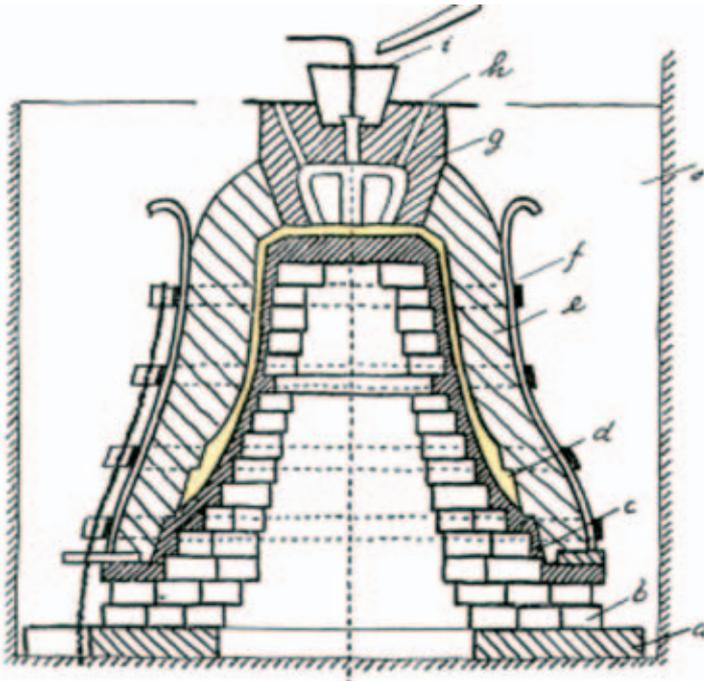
Section through the bell mould: a – base; b – bricked core; c – clay layer of the core; d – a false bell; e – cope; f – metal belts; g – mould for the crown; h – exhaust; i – groove for the inflow of metal; j – casting pit. Reproduced from a book by L. Kybalová (1959, 31).
